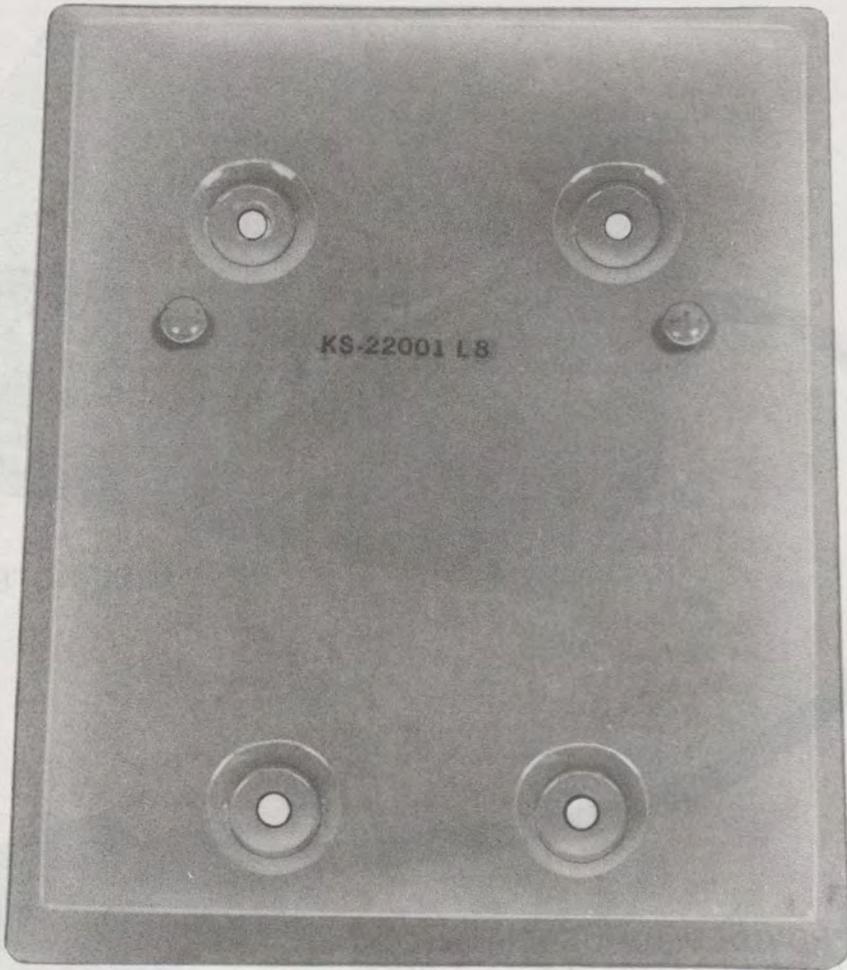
KS-22001, List 8 Portable Mounting Plate
